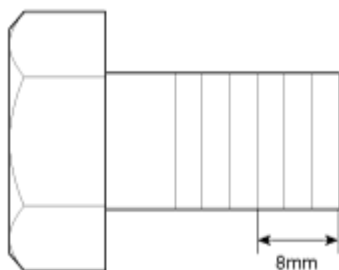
Identifying Flywheel Bolt (Drive Plate)
